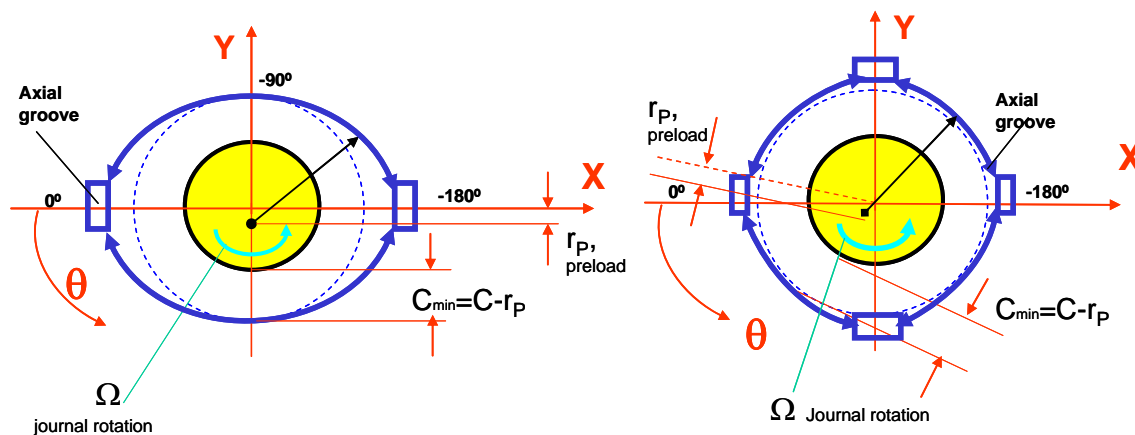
Geometry of elliptical (two groove) and four-pad cylindrical bearings (not to scale)
